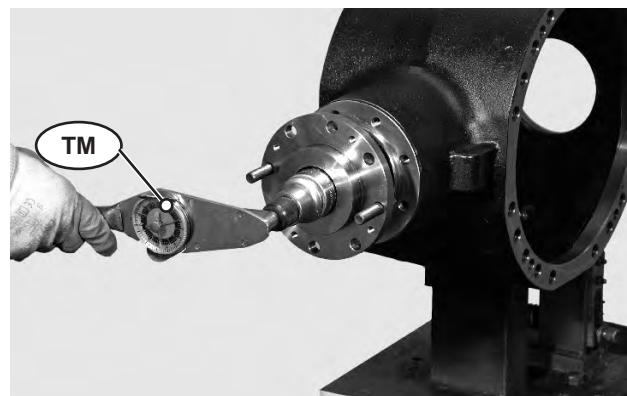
Apply onto the pinion (11) the bar-hold and with the help of a torque meter, check the torque of the pinion (11). Torque: 120 - 180 Ncm
